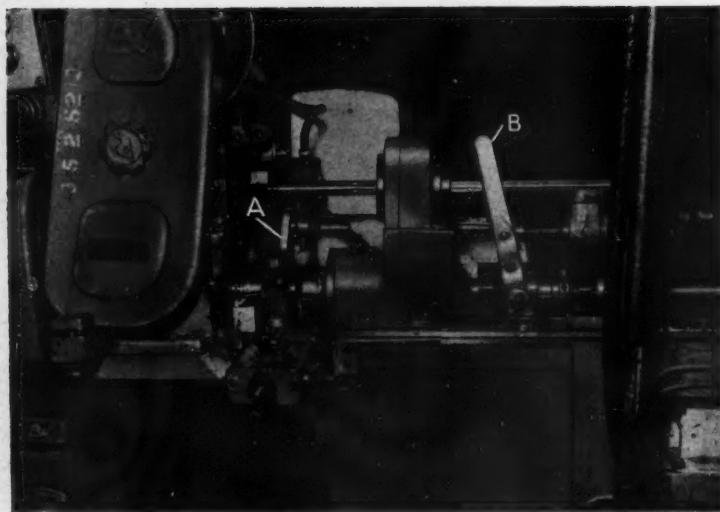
On each of the Brown & Ward automatics employed for the production of blanks for 2-piece exhaust valves, an auxiliary attachment provides for holding and driving the outer end of the bar stock
